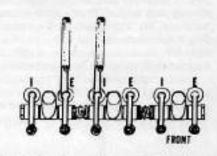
With No. 1 piston on "TDC" exhaust stroke on three cylinder engines, adjust intake valve on No. 2 cylinder and exhaust valve on No. 3 cylinder. Refer to Fig. 55.
